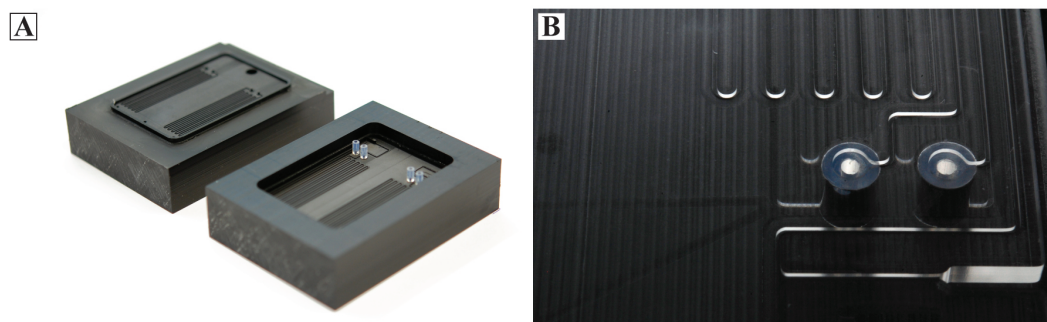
Images of double-sided machined molds. (A) Two mold halves with channel features milled into the surfaces. (B) Finished millifluidic device showing channels on the top and bottom surfaces of the cast PDMS. The channels are connected through the PDMS with FEP tubing cast in place.
